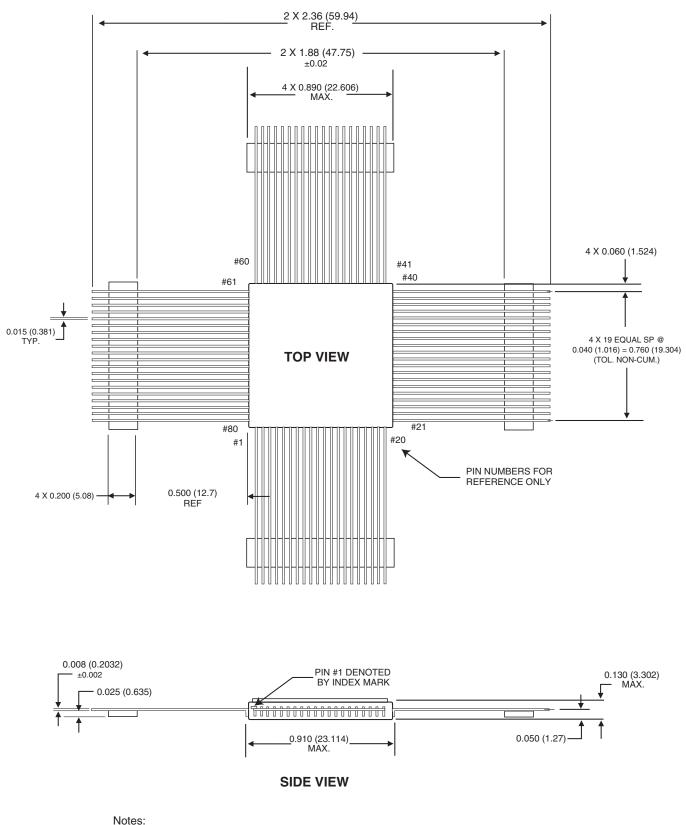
MECHANICAL OUTLINE DRAWING FOR MINI-ACE MARK3 80-PIN GULL WING PACKAGE Data Device Corporation DS-BU-6474X-AQ www.ddc-web.com 92 4/19
